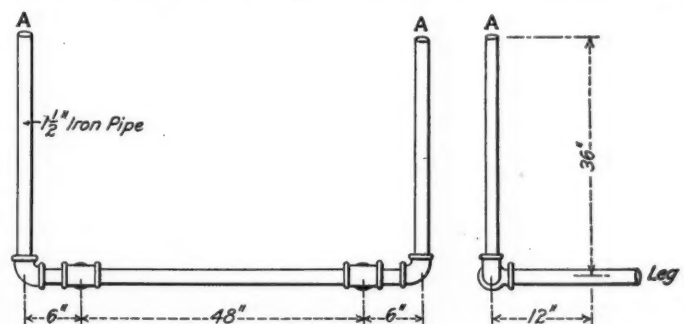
Air Hoist Attachment for the Convenient Handling of Axles Into an Axle Lathe.
